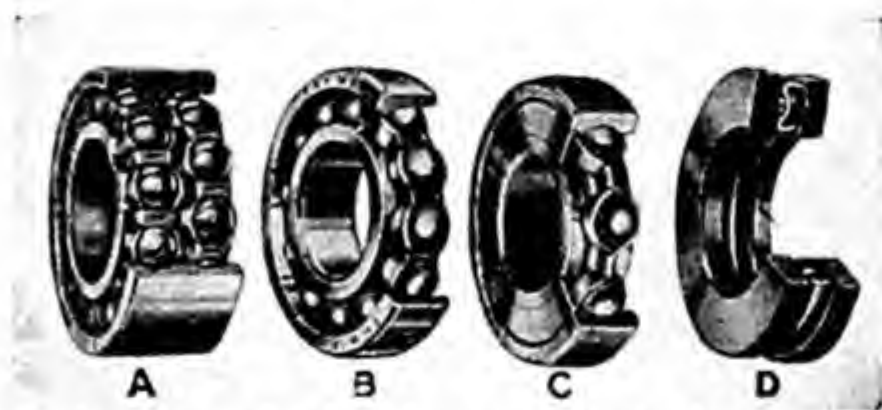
Types of ball bearing: A, double-row; B, single-row; C, single-row, with ring seal; D, end-thrust.
